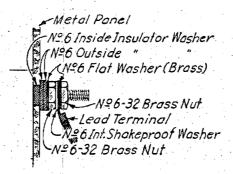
DETAIL OF SAFETY BREAKER MOUNTING TERMINAL
